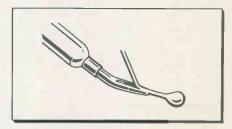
An offset slotted iron tiplet can be used to draw off excess solder from a terminal point. Solder flows into tiplet notch.
